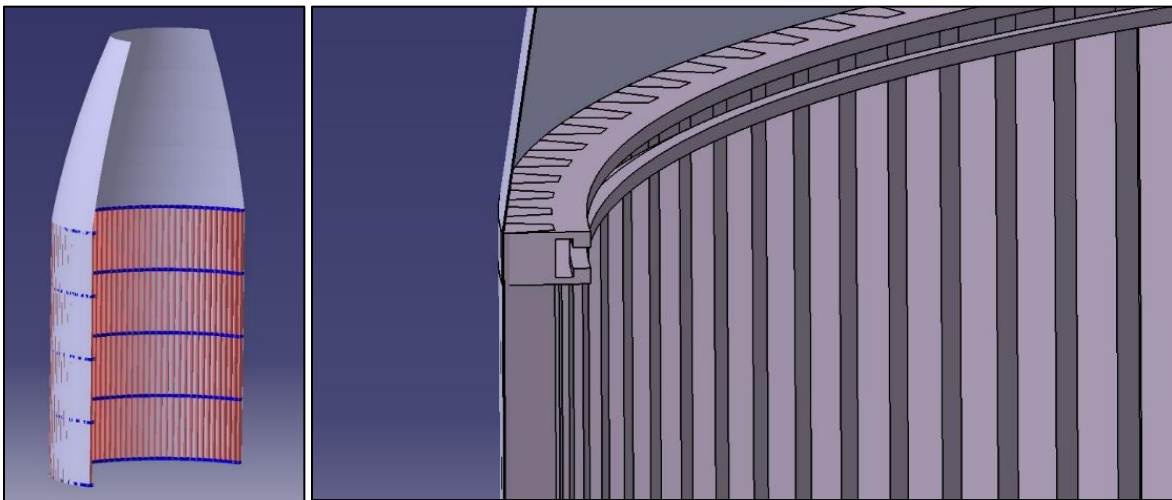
(Left) Isometric View of the Half Payload Bay and (Right) the Close-up View of the Mounting Recess of the Ring Reinforcement
